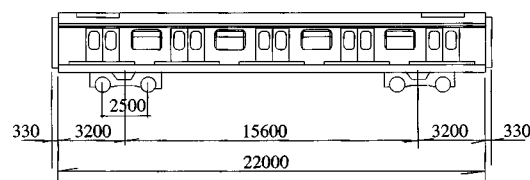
Detailed drawing of an electric multiple unit (all dimensions in mm).
